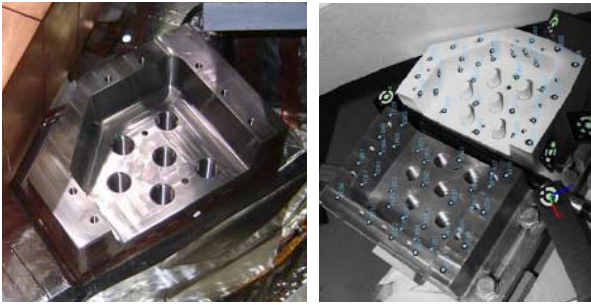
Coil block welded to NPC5 (left). Coil blocks of a test mock-up simulating assembly conditions (right) with reference marks for photogrammetric scanning.
